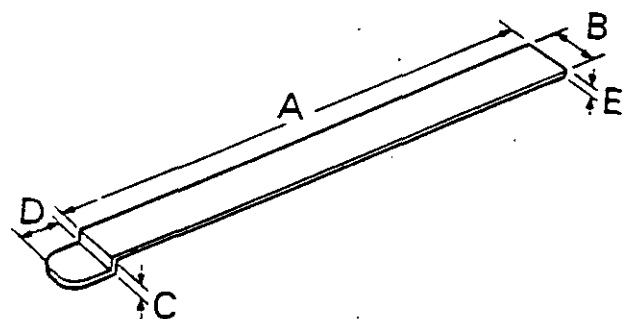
FEELER GAUGE — LAYCOCK CLUTCH
